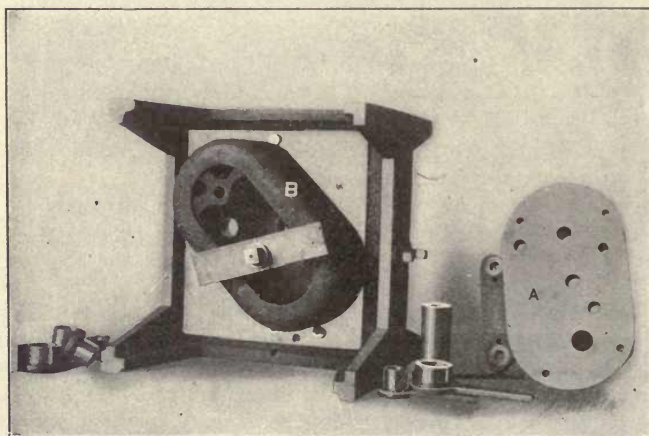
Rear View of Drill Jig shown in Fig. 75, with Cover to be Drilled in Place
